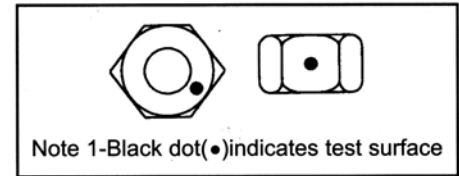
Significant Surfaces on Internally Threaded Fasteners
